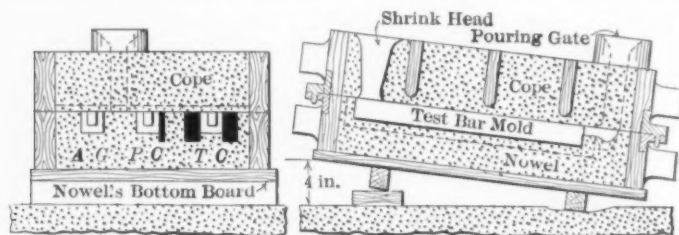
SECTIONAL VIEWS OF MOLD FOR MAKING THE SQUARE TEST BARS
